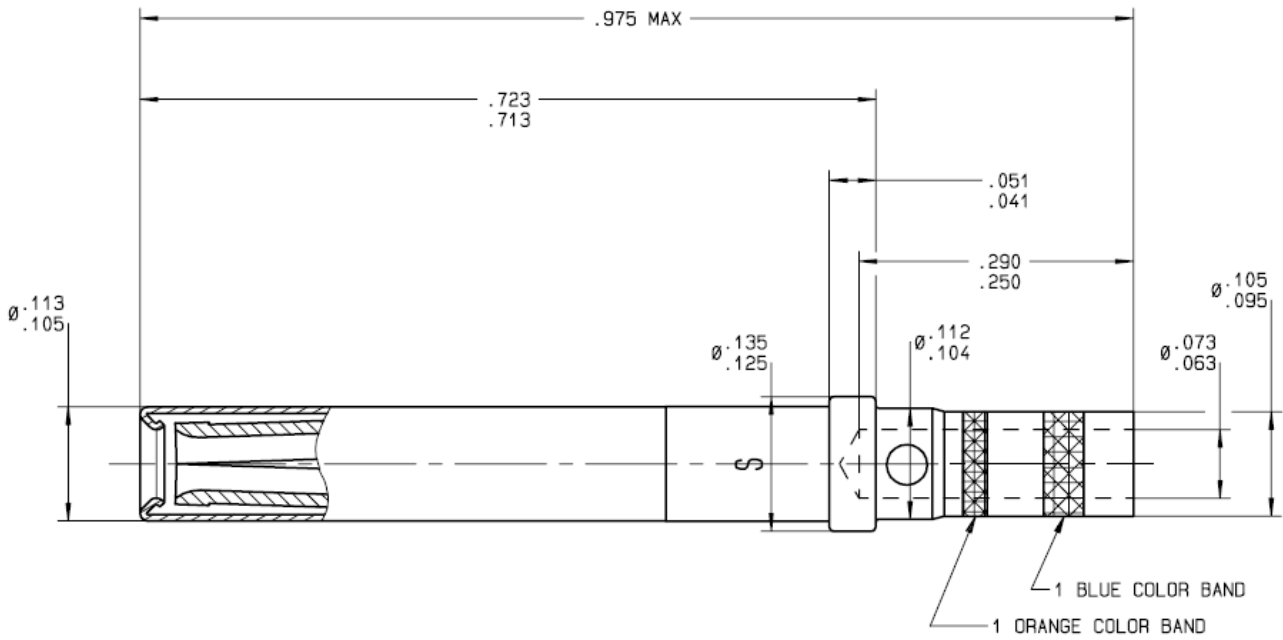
Size 16 Crimp Removable Socket Contact (In Inches)
